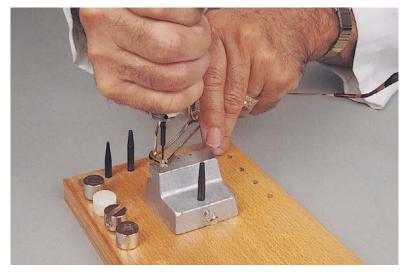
Mounting a screw extractor blade in a drill will allow extra torque to be applied when trying to remove a broken-off screw. (Courtesy Hilco, Plainville, Mass.)
